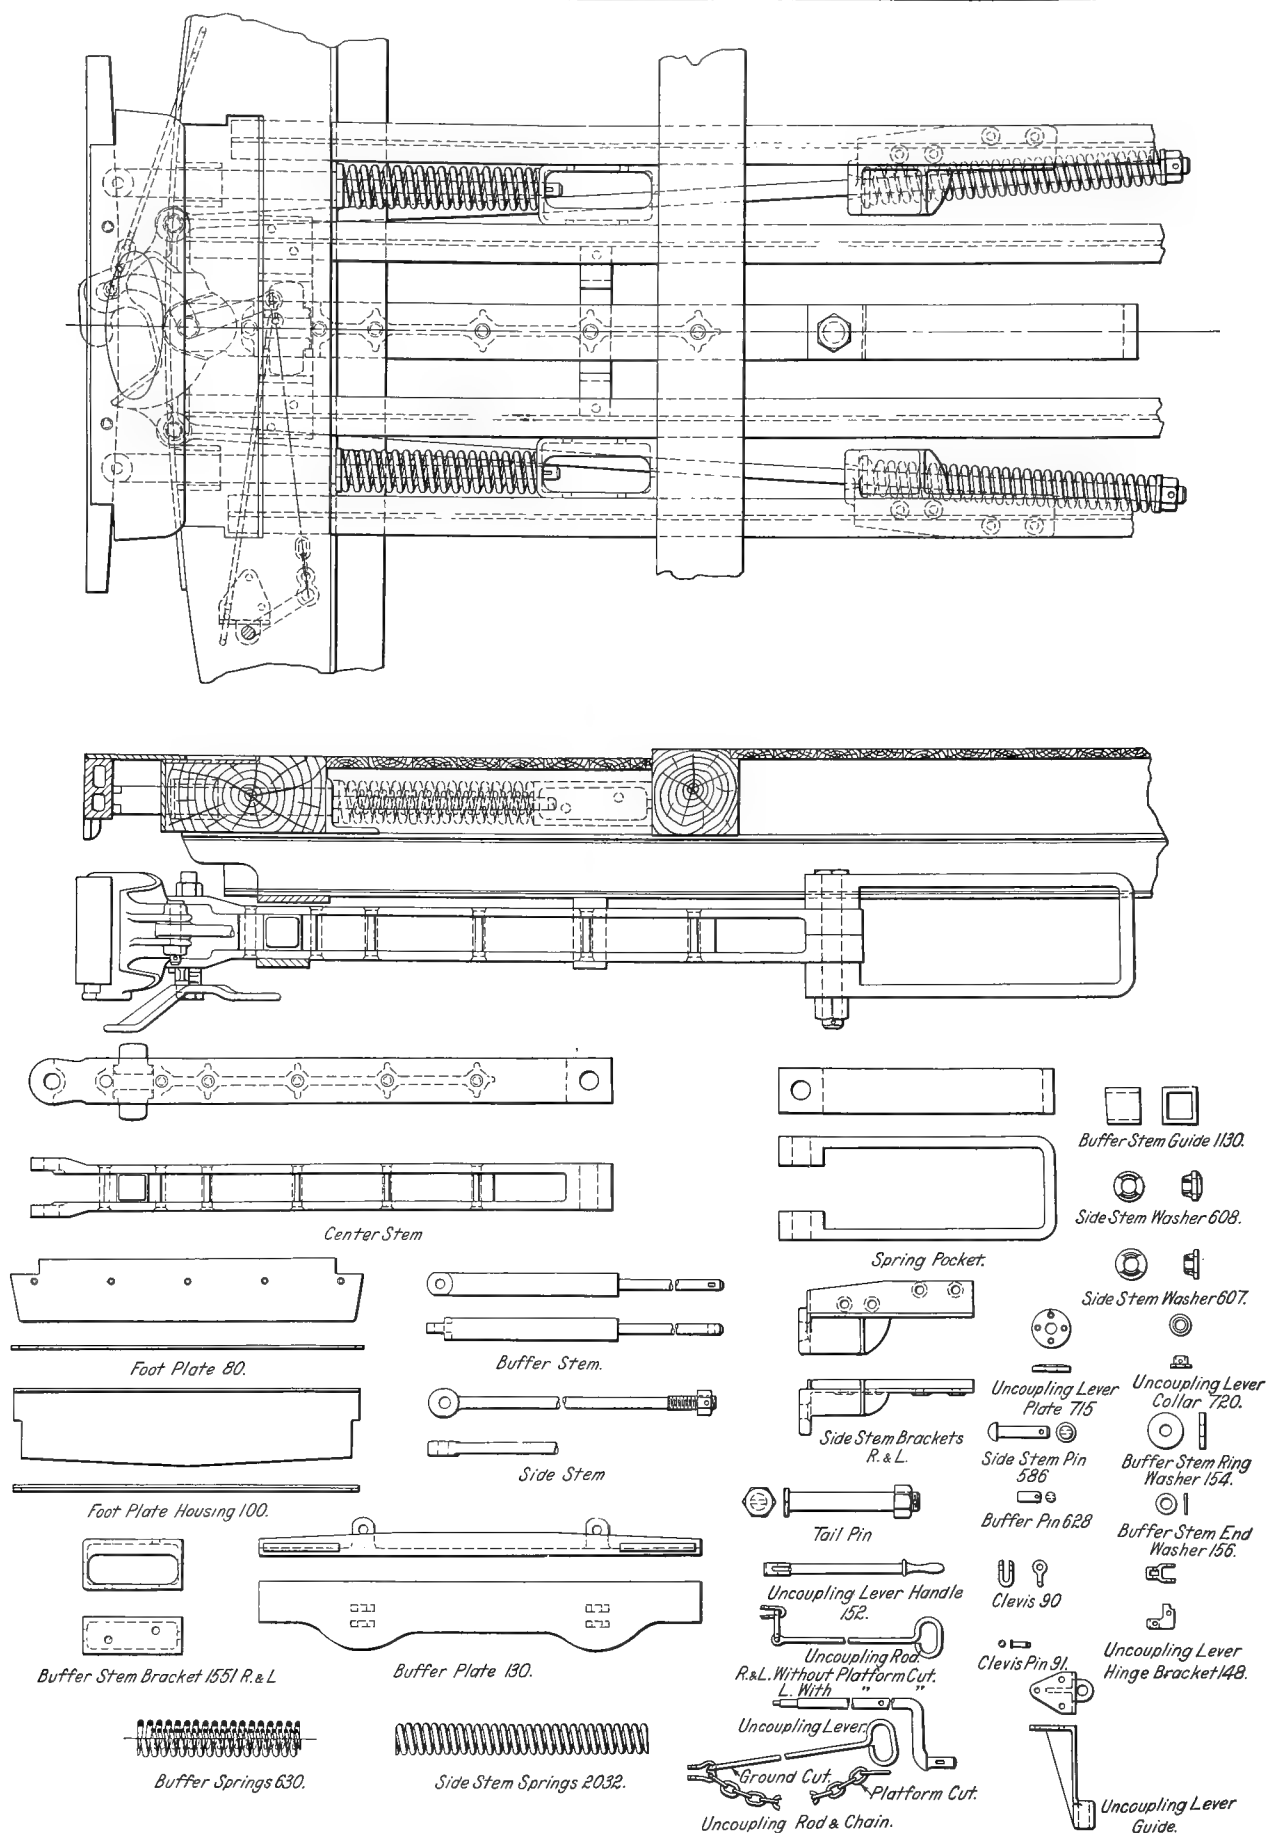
Buhoup Three-Stem Equipment and Parts for Passenger Train Car Platforms. McConway & Torley Company.
